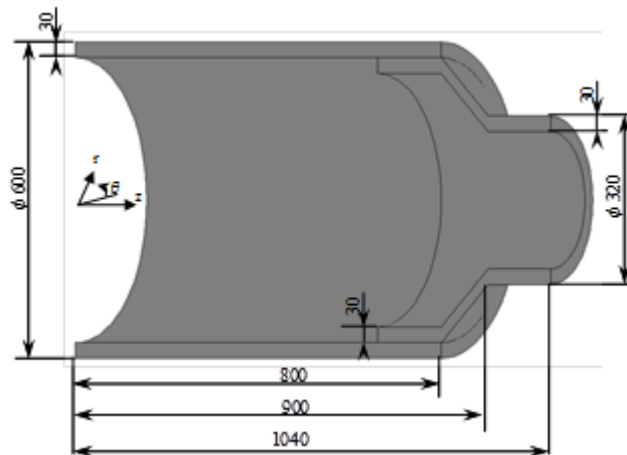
Dimensions of 1/4 cylindrical model (mm)
